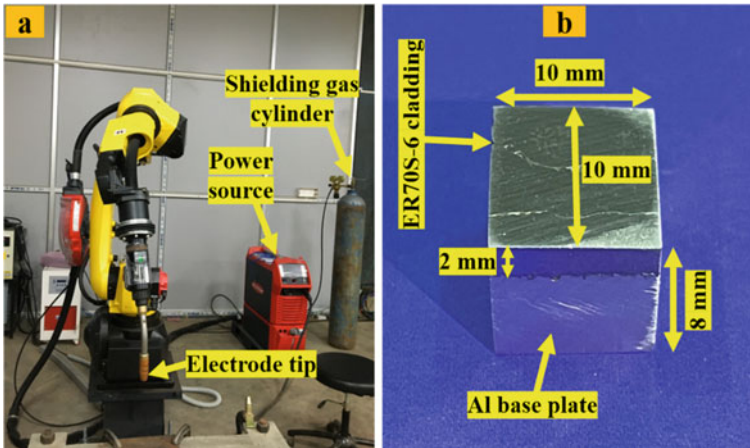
Cladded layer developed using CMT technique: a setup and b extracted characterization sample after milling
